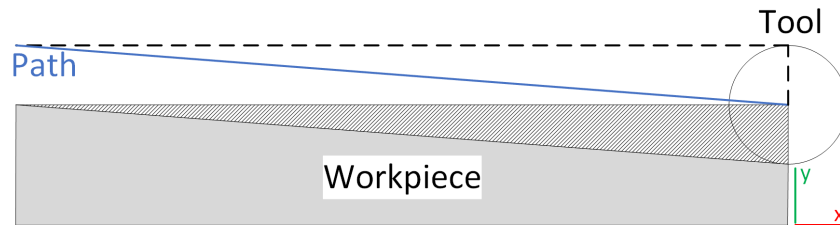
Top view of the toolpath and cut workpiece in the linear peripheral cut.
